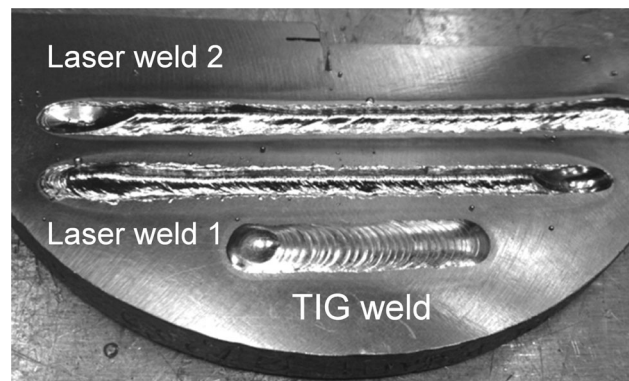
Bead on plate welds Ti-64 cast material. Laser weld 1 was investigated in the present work.
